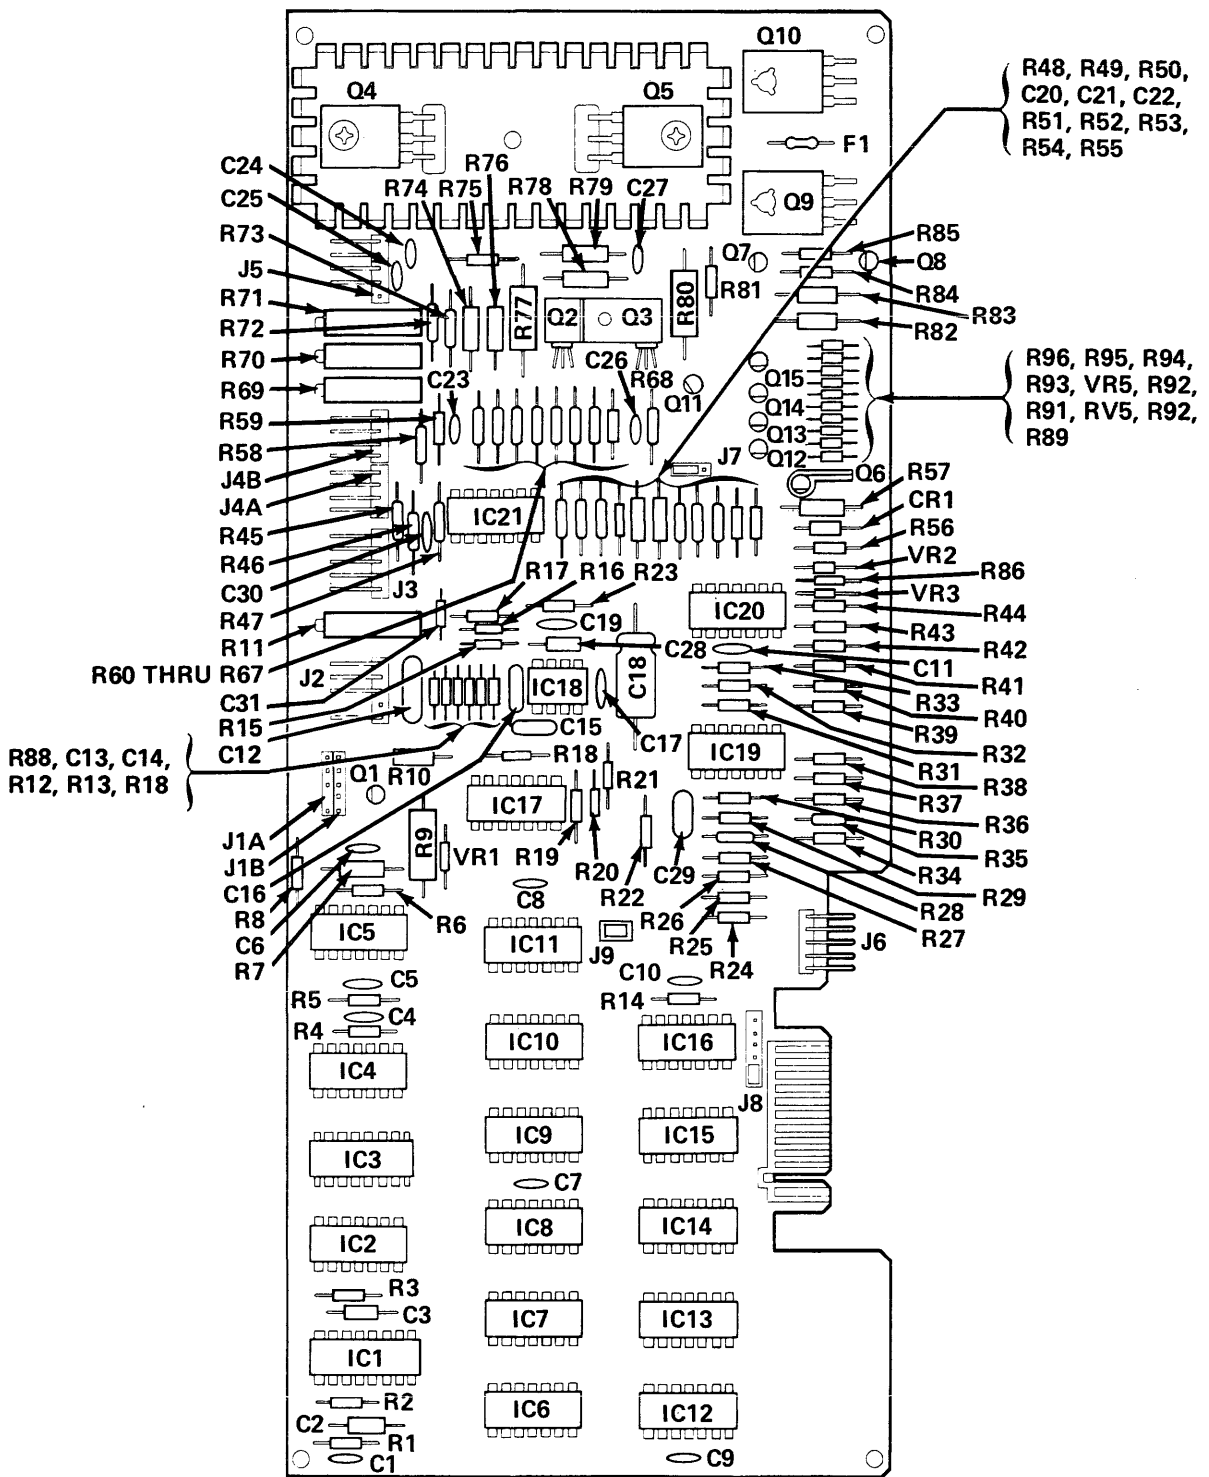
Servo Electronics and Read/Write Amplifier Board Component Layout
